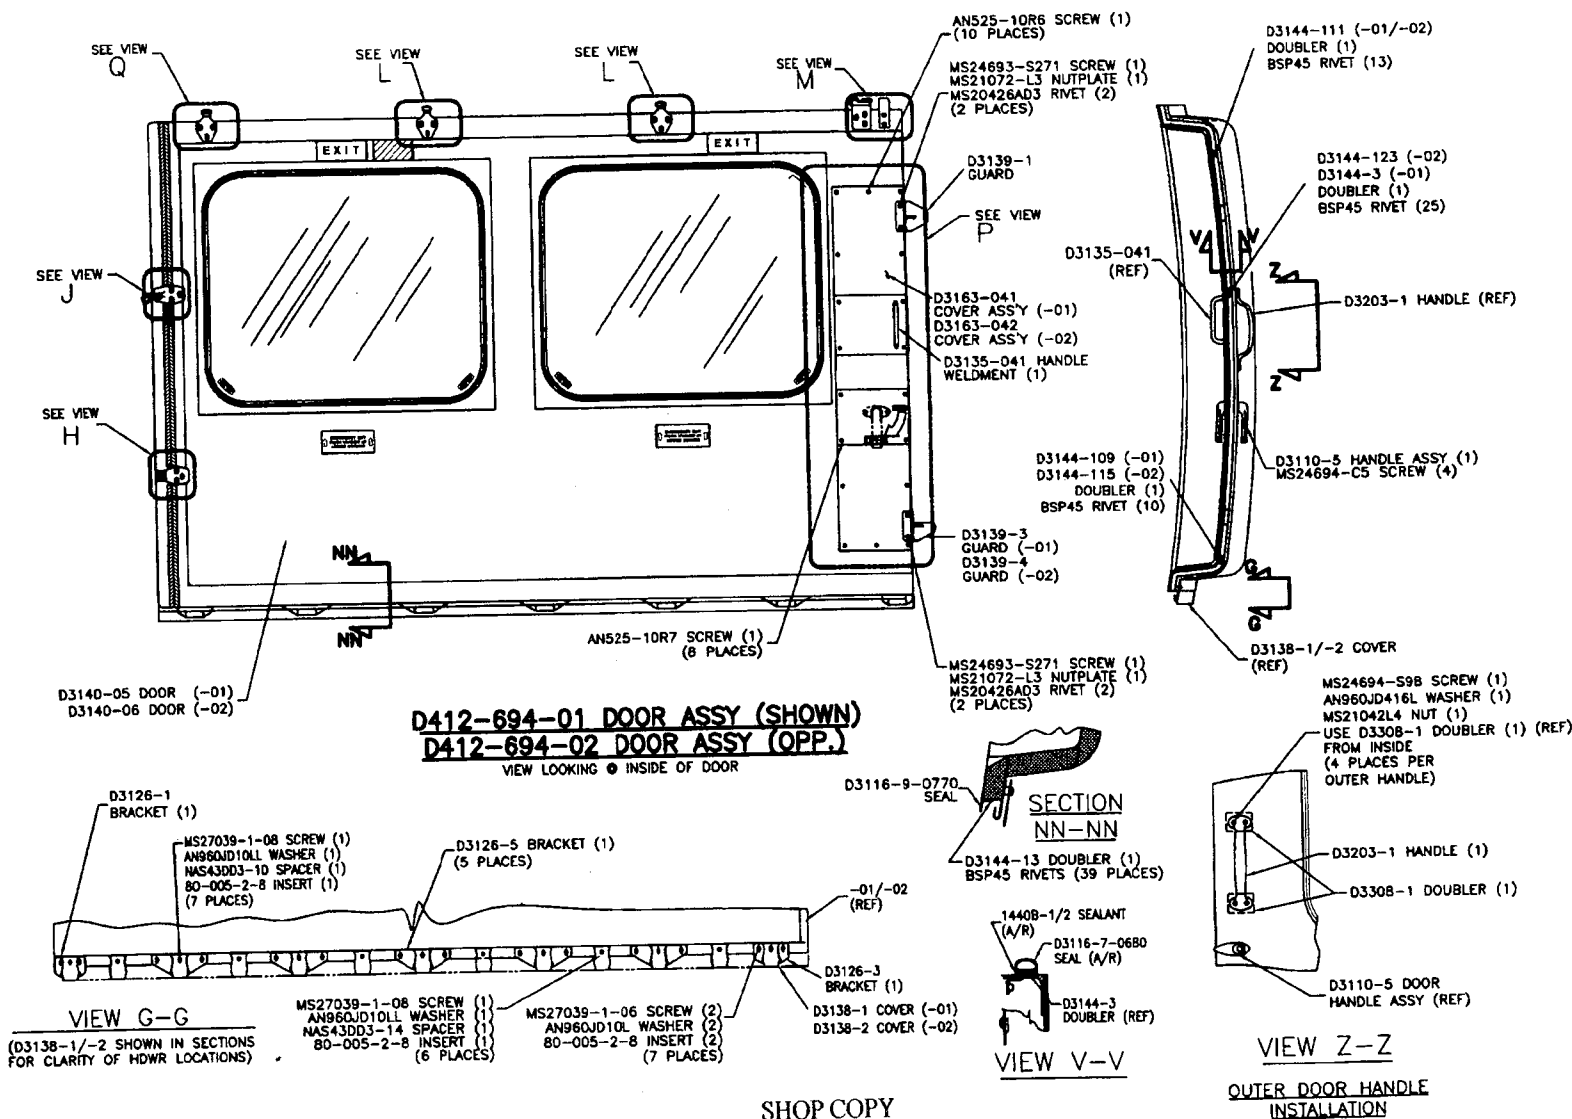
Replacement Parts: D412-694-01/-02 Door Assembly
